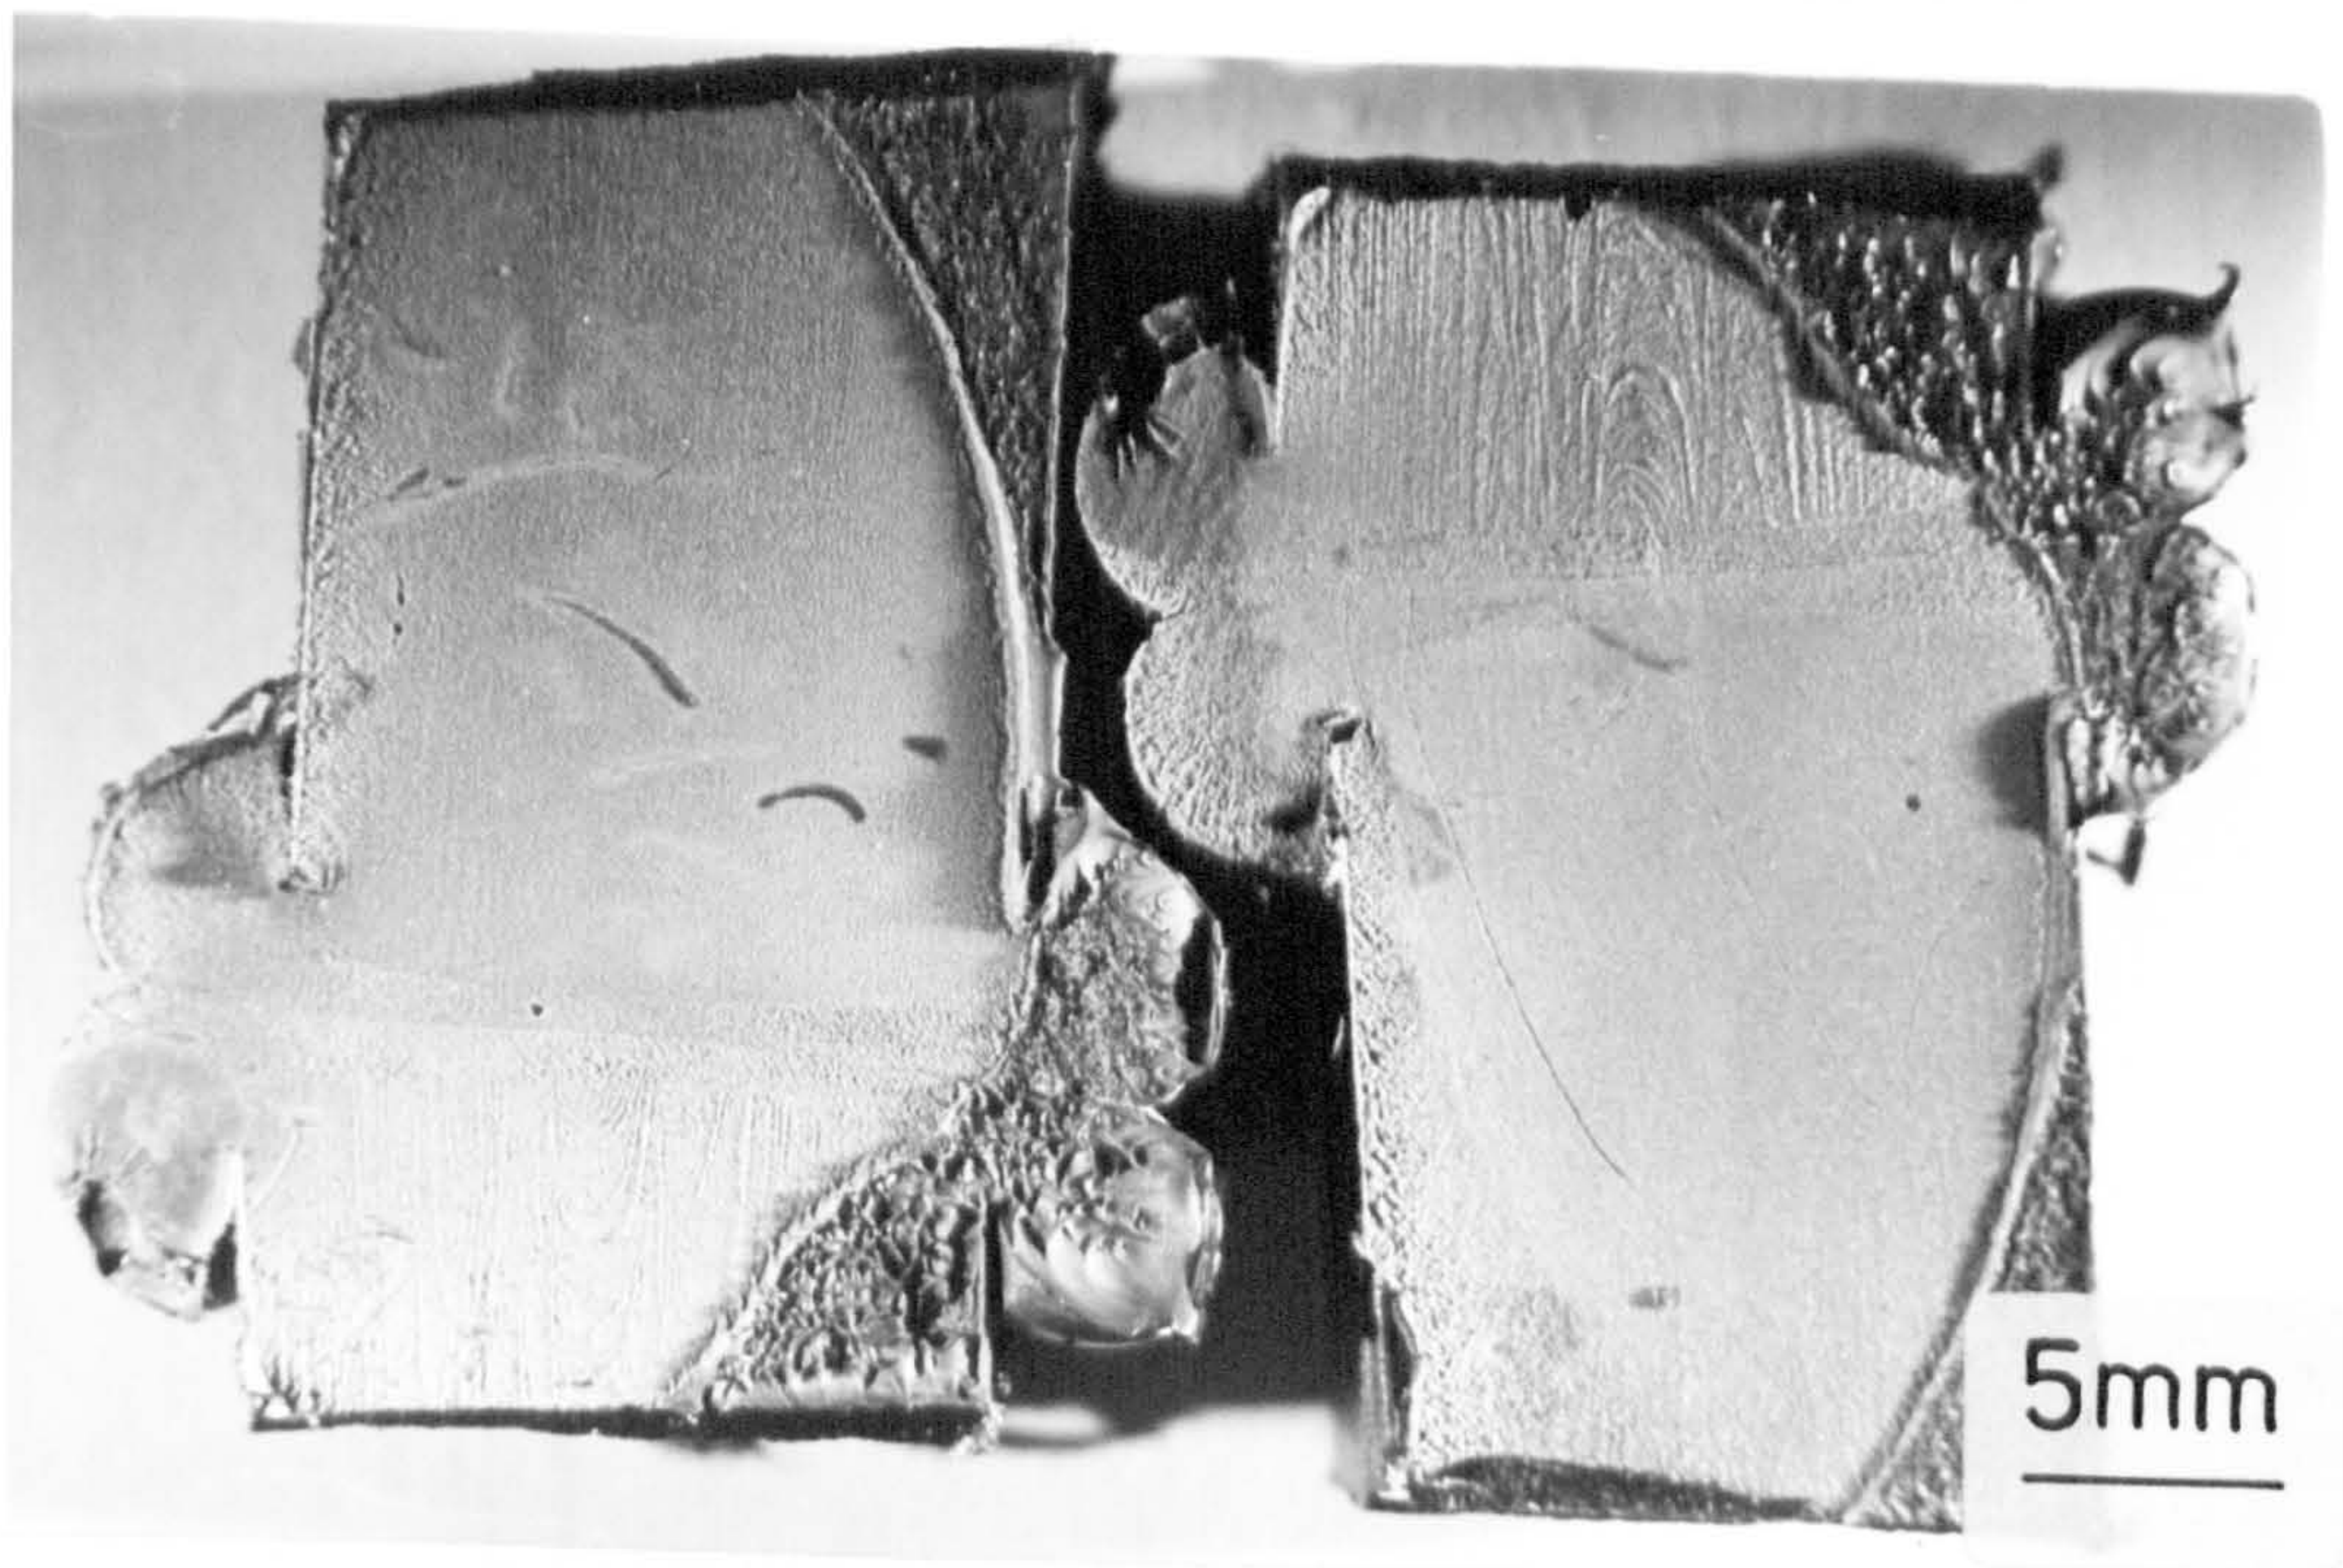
T2 type 1 fracture surface in HDPE 1 pipe.
